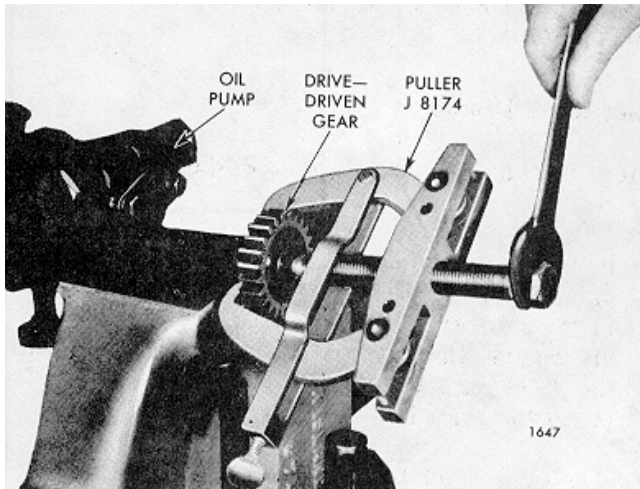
Removing Oil Pump Drive-Driven Gear from Shaft
